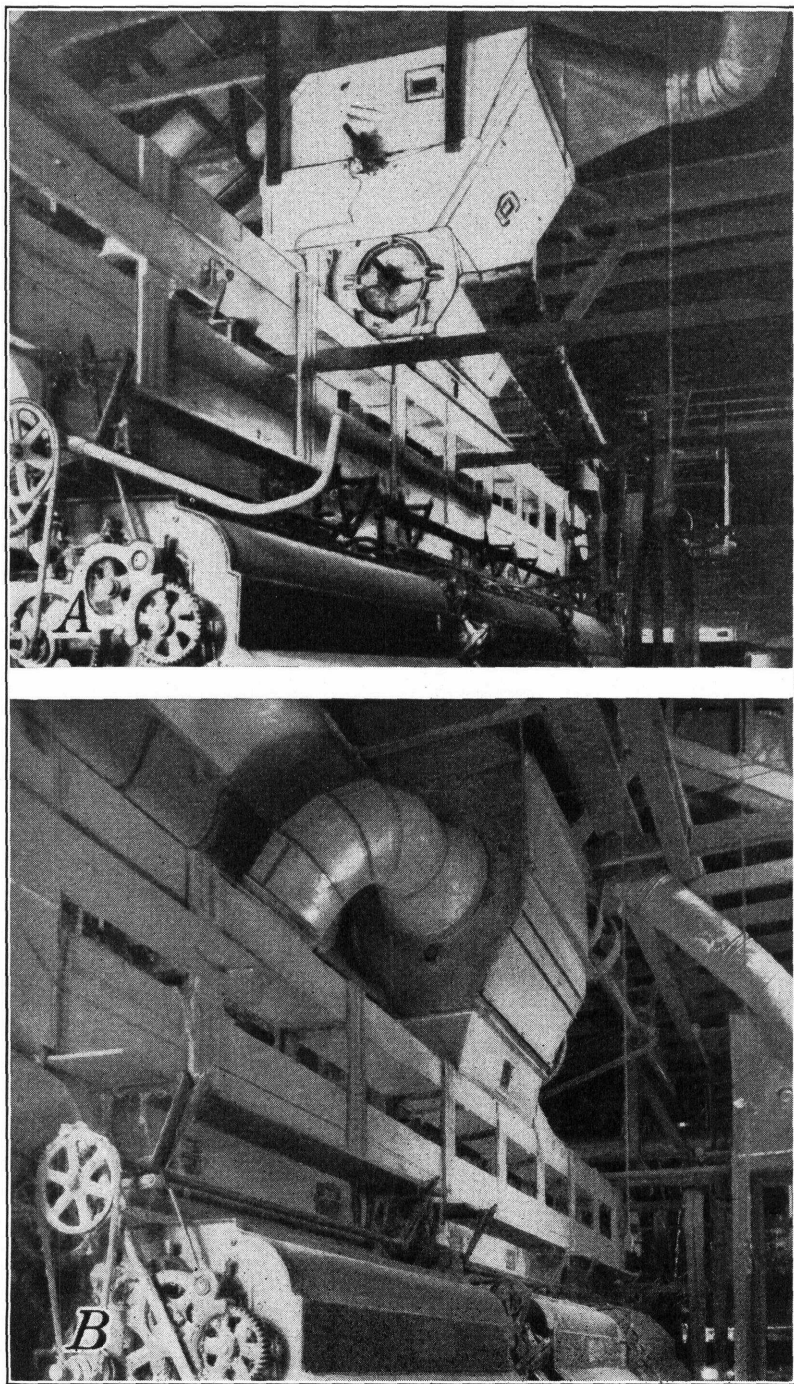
Gin outfit (A) before and (B) after the installation of a conveyor-distributor drier.
